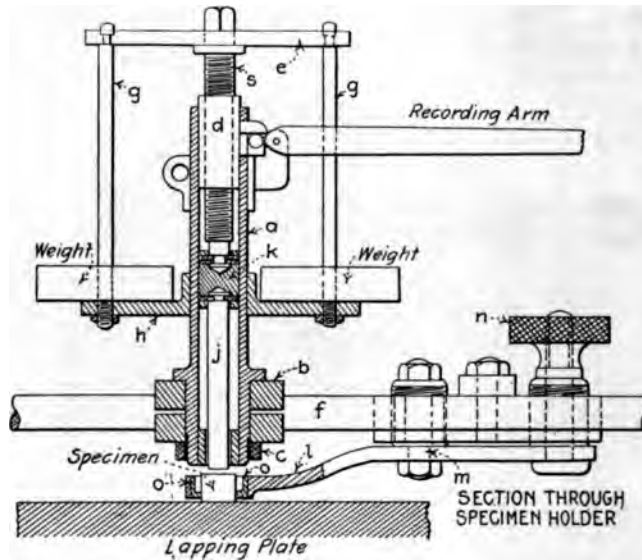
SECTION THROUGH SPECIMEN HOLDER
